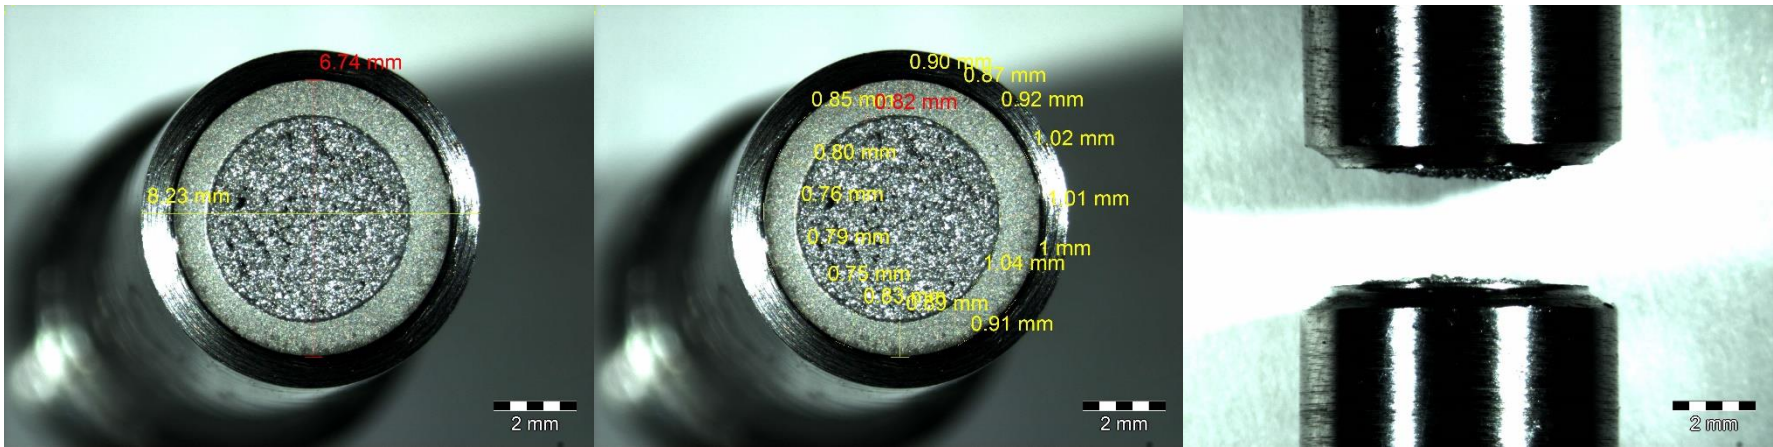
Cross-sectional and side view of fractured S355LSD-02
